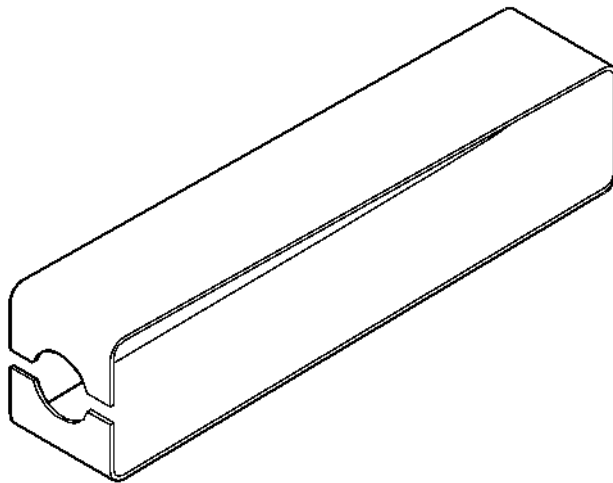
Valve Guide Remover (2 Valve), J 267-A
